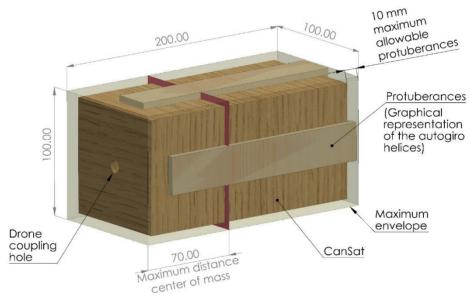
CanSat's maximum dimensions and outside Shell of the structure in 2025.
